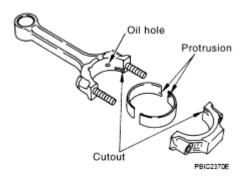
Identifying Connecting Rod And Corresponding Bearing Courtesy of NISSAN MOTOR CO., U.S.A.
